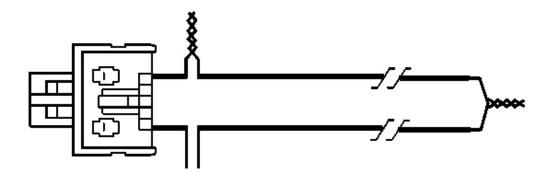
View Of Proper Twisting Of Connector Wire Lead To Deployment Wire Courtesy of GENERAL MOTORS CORP.
